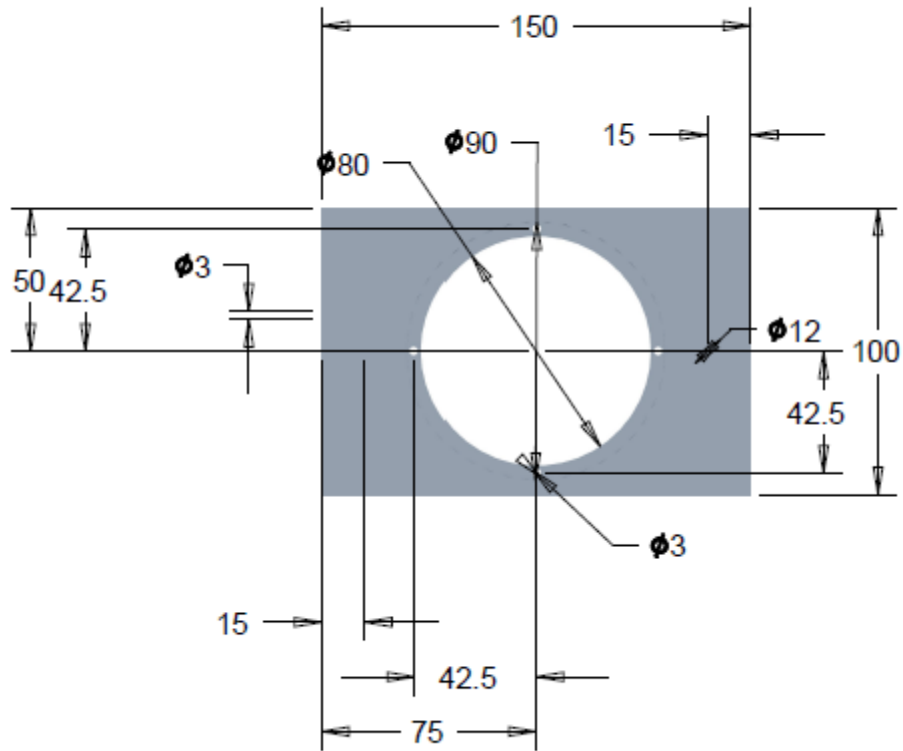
Z-axis mechanism top plate CAD Model (mm)
